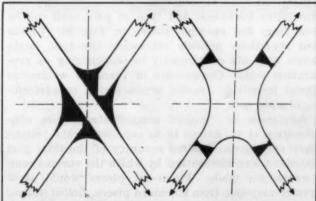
Above—Large, massive welds require an excessive amount of weld metal and do not have the predictability of a joint designed around a special shape
